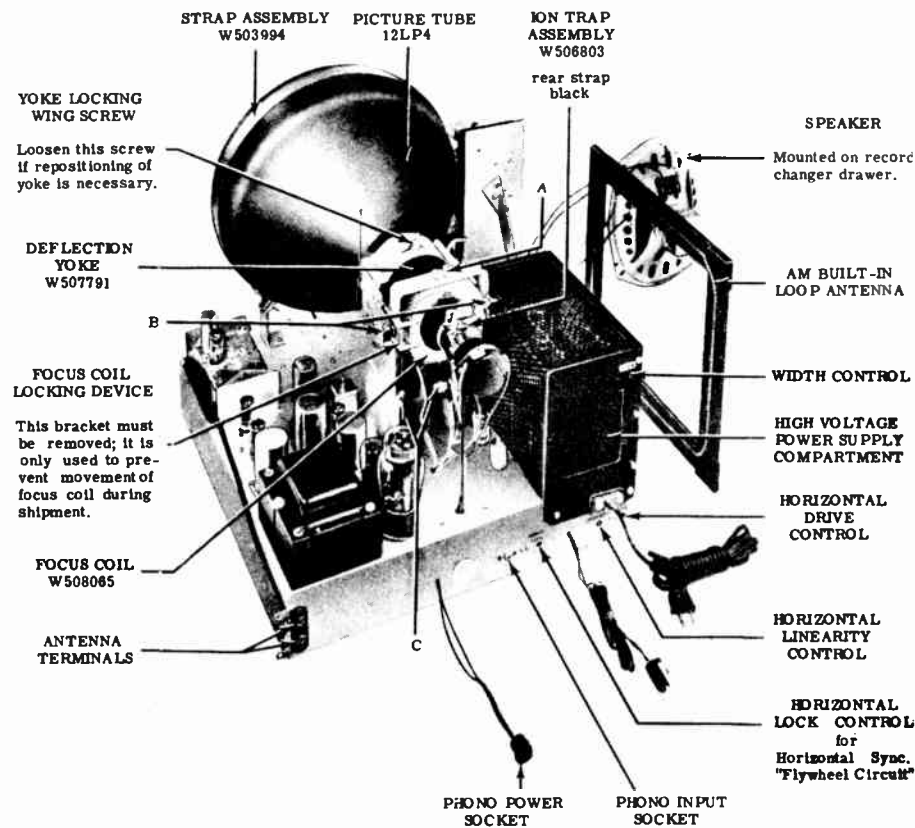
CHASSIS AND PICTURE TUBE ASSEMBLY
